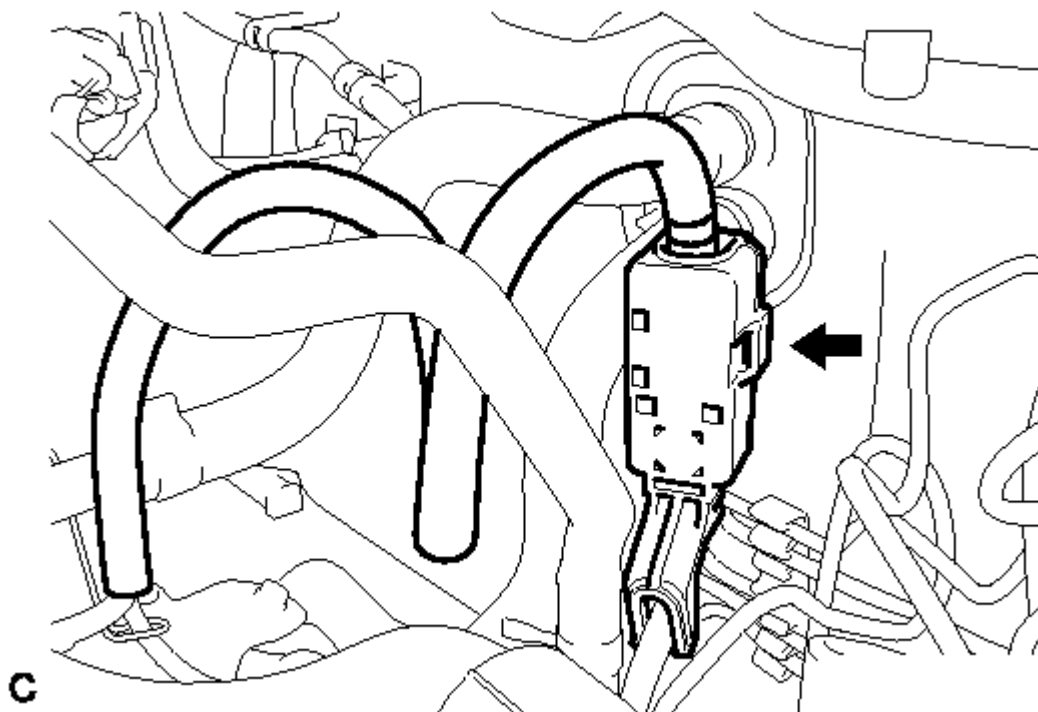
Location of No. 1 Fuel Pipe Clamp
